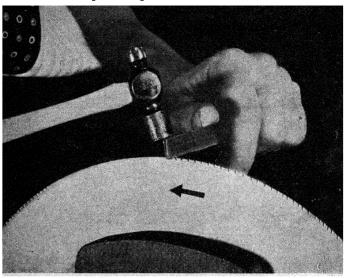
Cut nicks in the steel sawing disk with a hack-saw blade sharpened like a wood chisel using a lightweight hammer.
